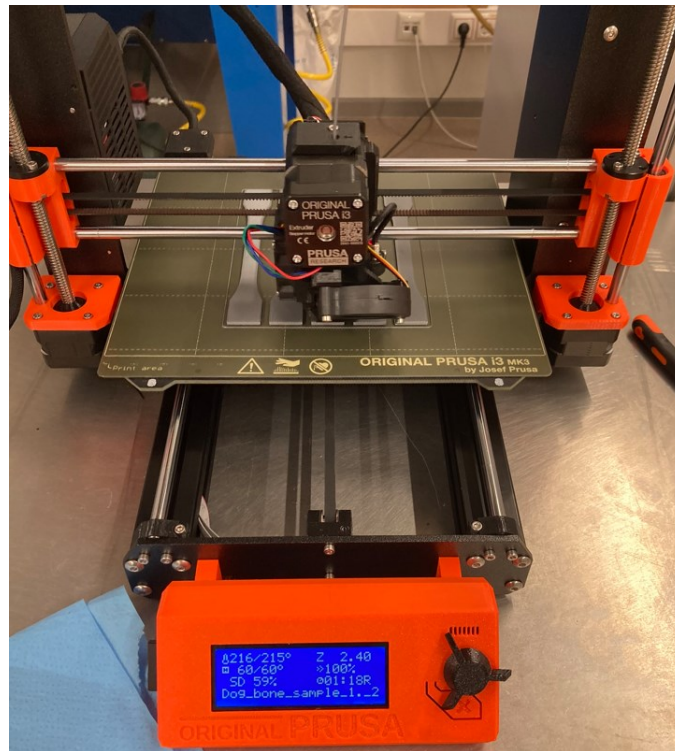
Original Prusa i3 MK3S+ 3D printer producing samples
